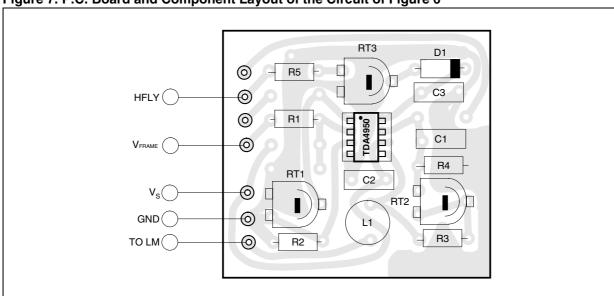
P.C. Board and Component Layout of the Circuit of Figure 6
